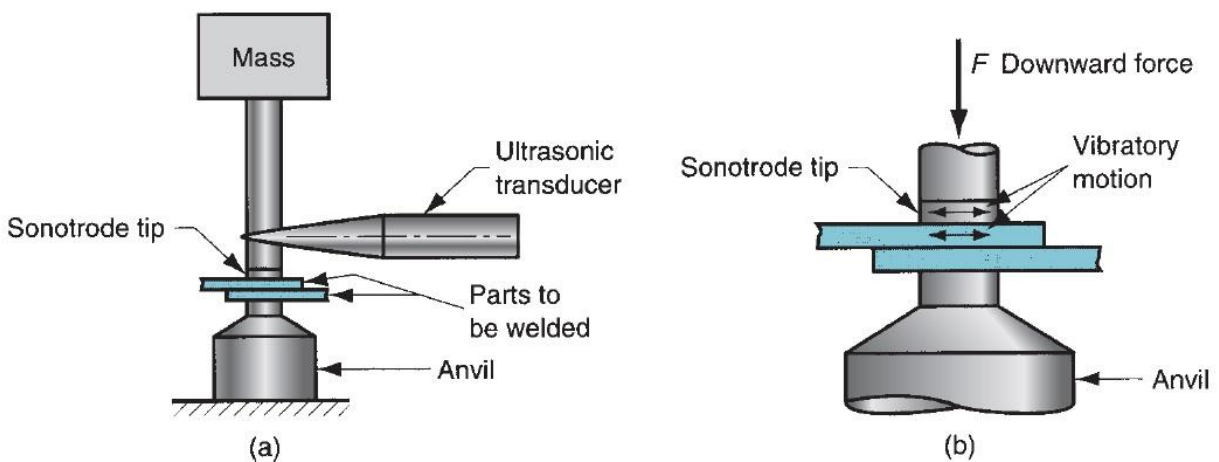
Ultrasonic welding (USW): (a) general setup for a lap joint; and (b) close-up of weld area.
